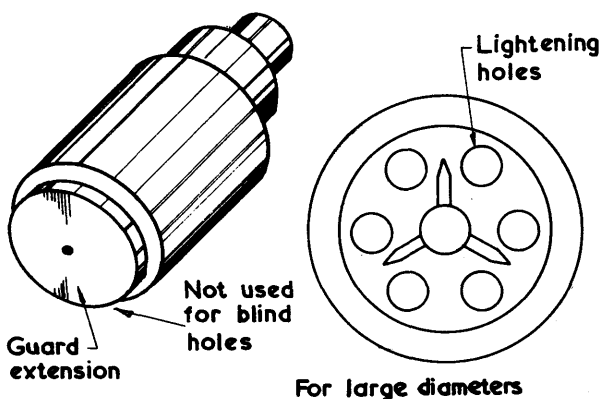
Details of Gauging Members for Trilock Design.
